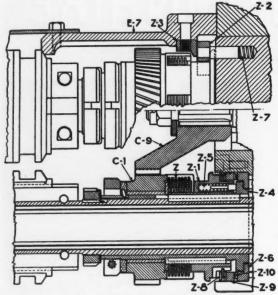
Drawing of Spindle Stopping Mechanics as Used on Acme Gridley Automatic Machine
